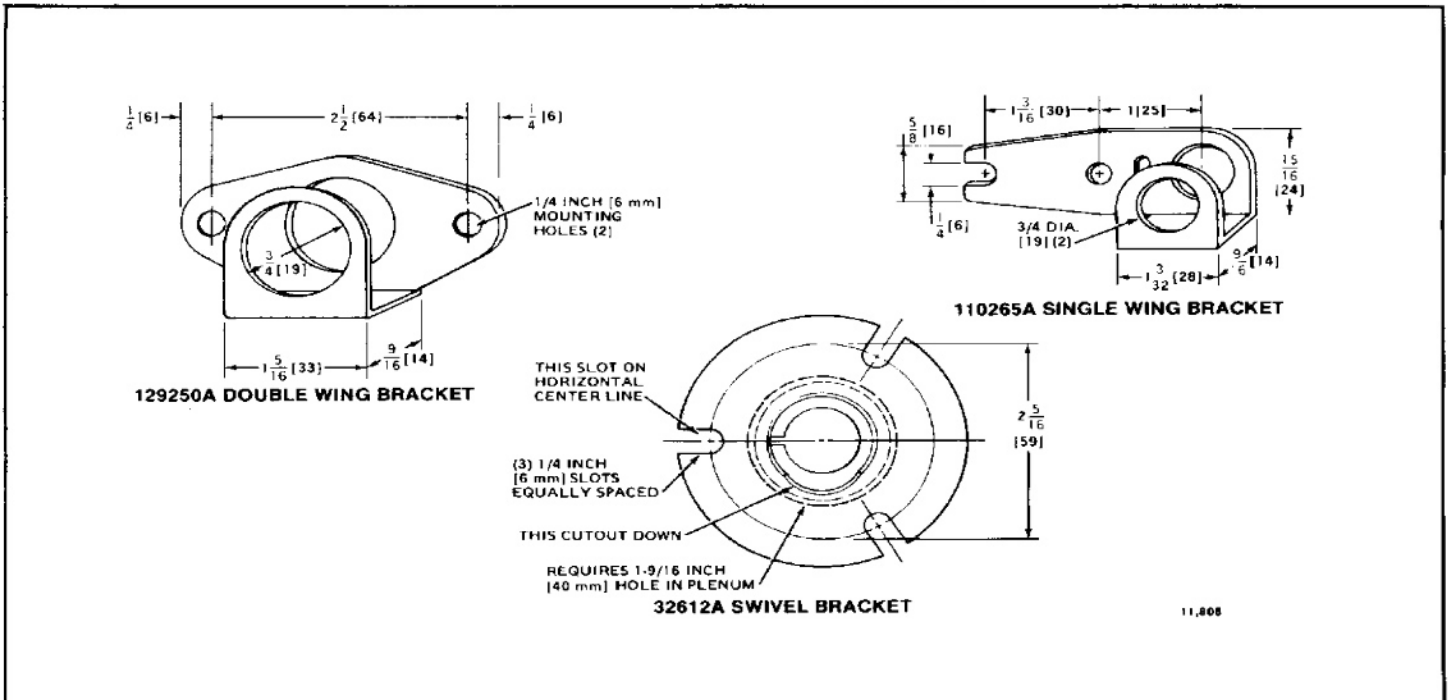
MOUNTING DIMENSIONS IN in. [mm IN BRACKETS] OF BRACKETS.
